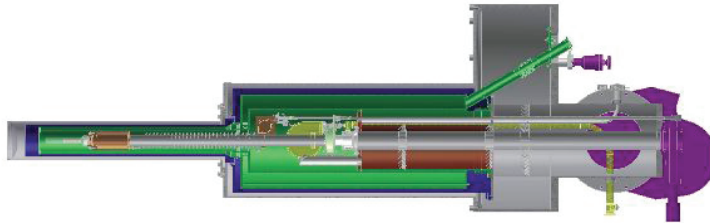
CAD view of the HD-ice target cryostat which will be inserted inside CLAS.
